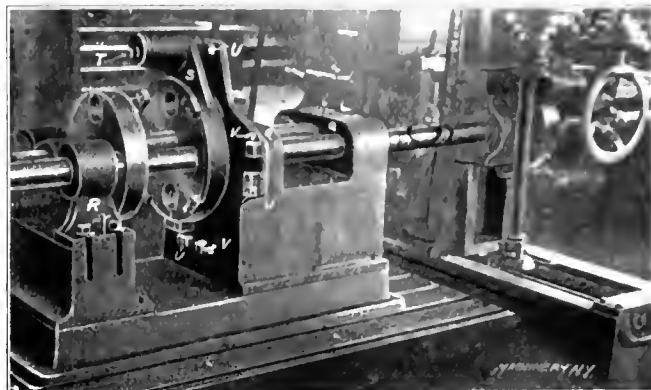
Finish Boring the Spindle Holes in an Accurate Indexing Jig
